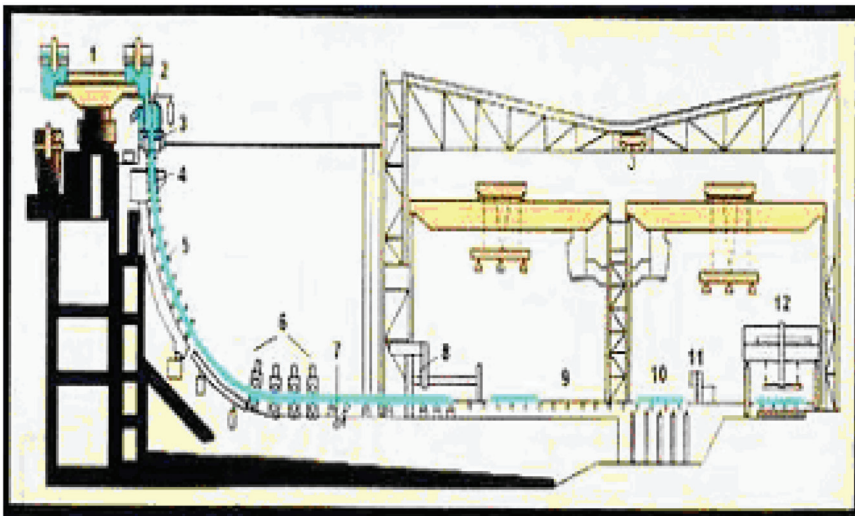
Slab caster machine configuration: (1) Ladle Turret, (2) Tundish/Tundish Car, (3) Mould, (4) First Zone (Secondary Cooling), (5) Strand Guide (plus Secondary Cooling), (6) Straightener Withdrawal Units, (7) Dummy bar disconnect roll, (8) Torch cut-off unit - to generate discrete slabs from continuous strand.
